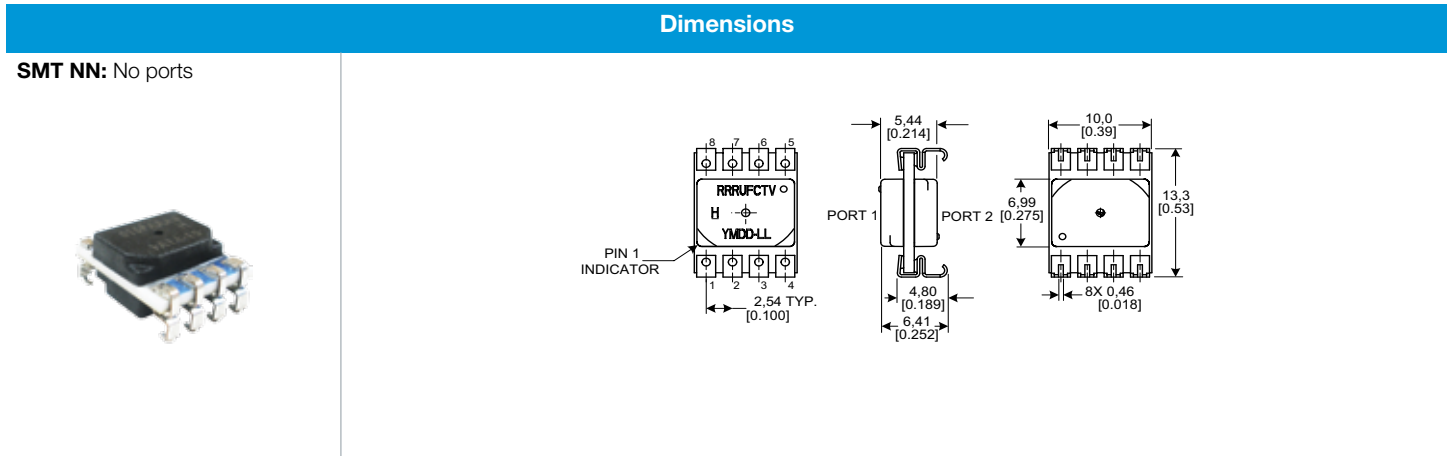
SMT Package Dimensional Drawings (For reference only: mm [in].)
